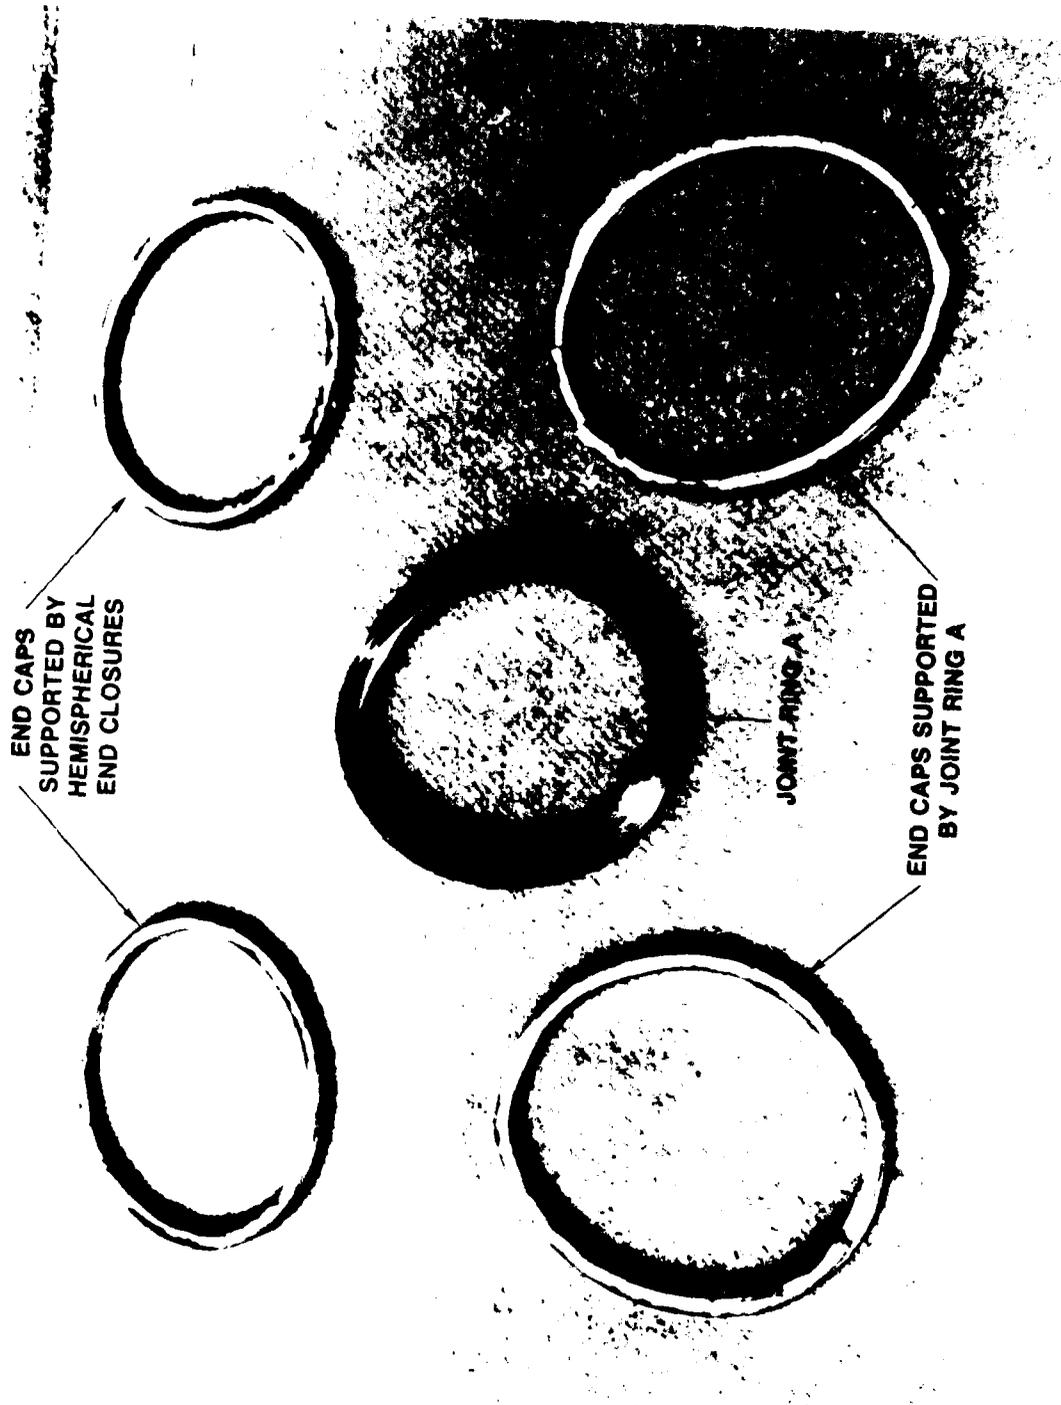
The buckling of joint ring A caused the Model 1 ceramic cylinders of Test Assembly III to fail at 7,400 psi of external pressure. This finding is based on the observation that only the end caps of the cylinder supported by the joint ring A deformed, while those supported by the end closure did not.
